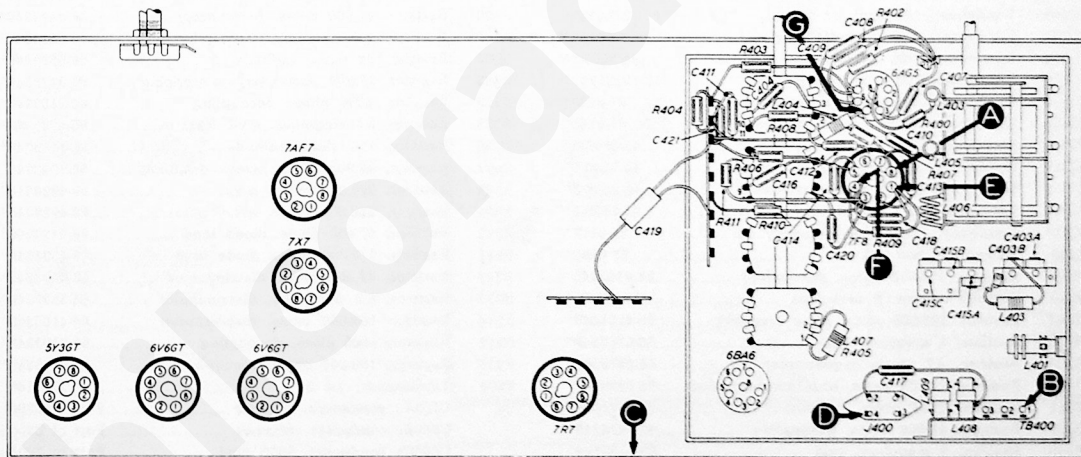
BOTTOM VIEW, SHOWING SECTION 4 TEST POINTS.
